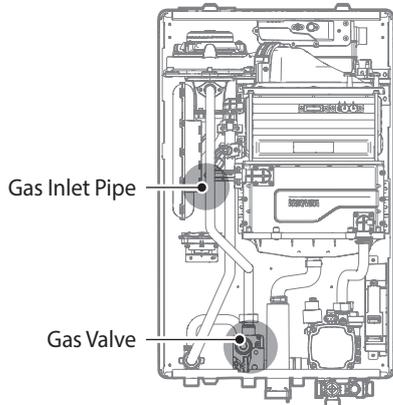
NCB 24 / 28 / 34LDWE, NCB 20/24/28LHWE Internal Components
